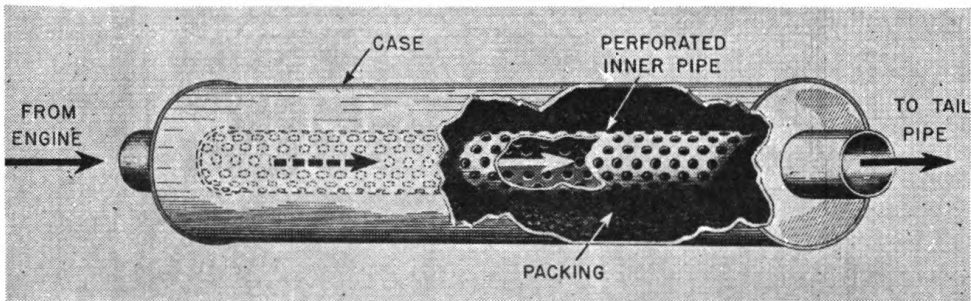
Straight through type muffler having mineral wool or other insulating packing between case and perforated pipe.
